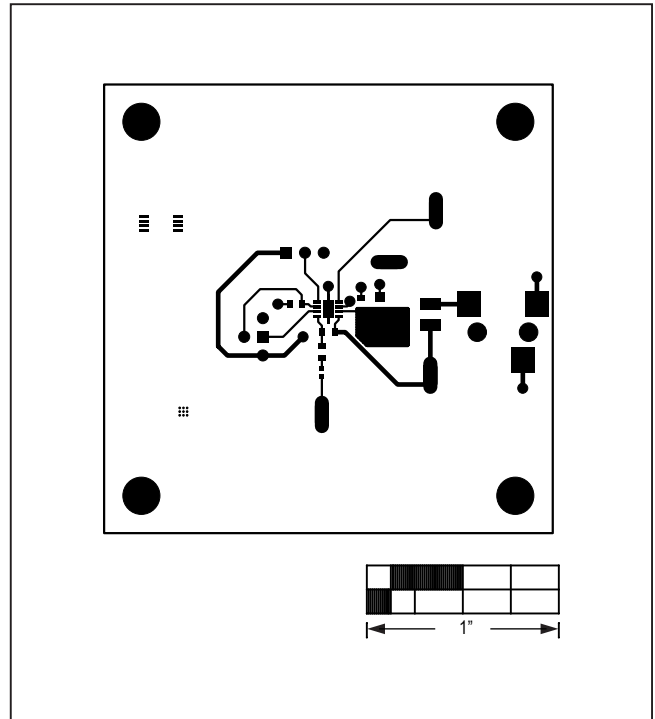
MAX9716 EV Kit PC Board Layout—Component Side
